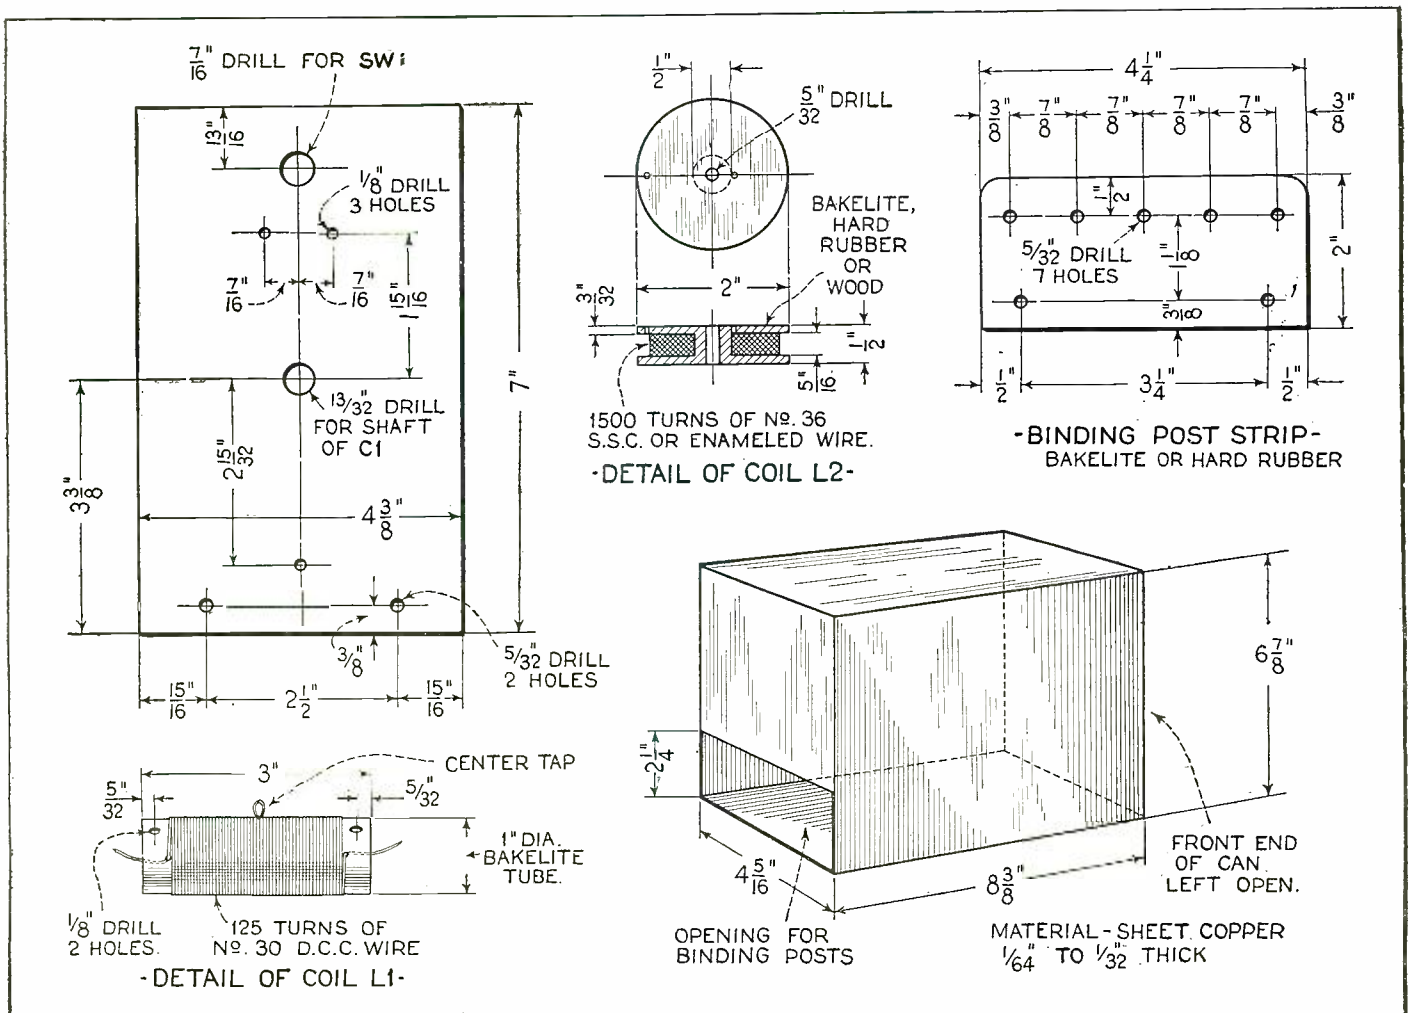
Complete drilling and winding details for coils and panels, and dimensions of the shield for the booster unit.
